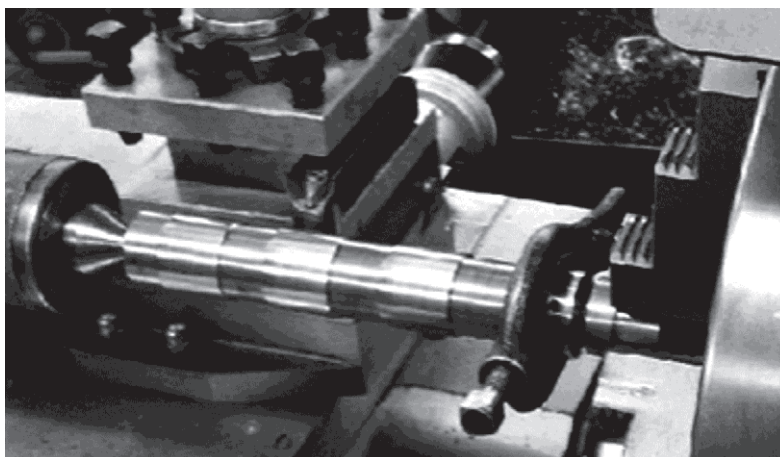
The view of working assembly (machine tool, fixture, object, tool) – lathing
